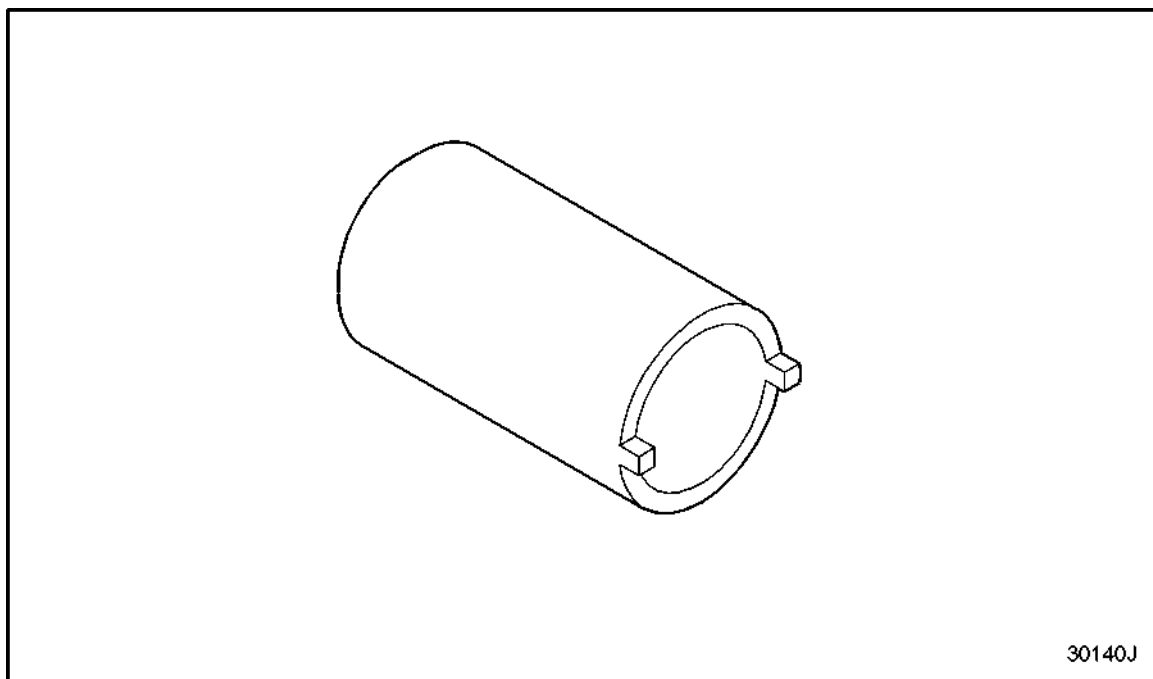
Spanner Nut Socket Hi Speed Spring,J 5345-12 (old number J 5345-5)
